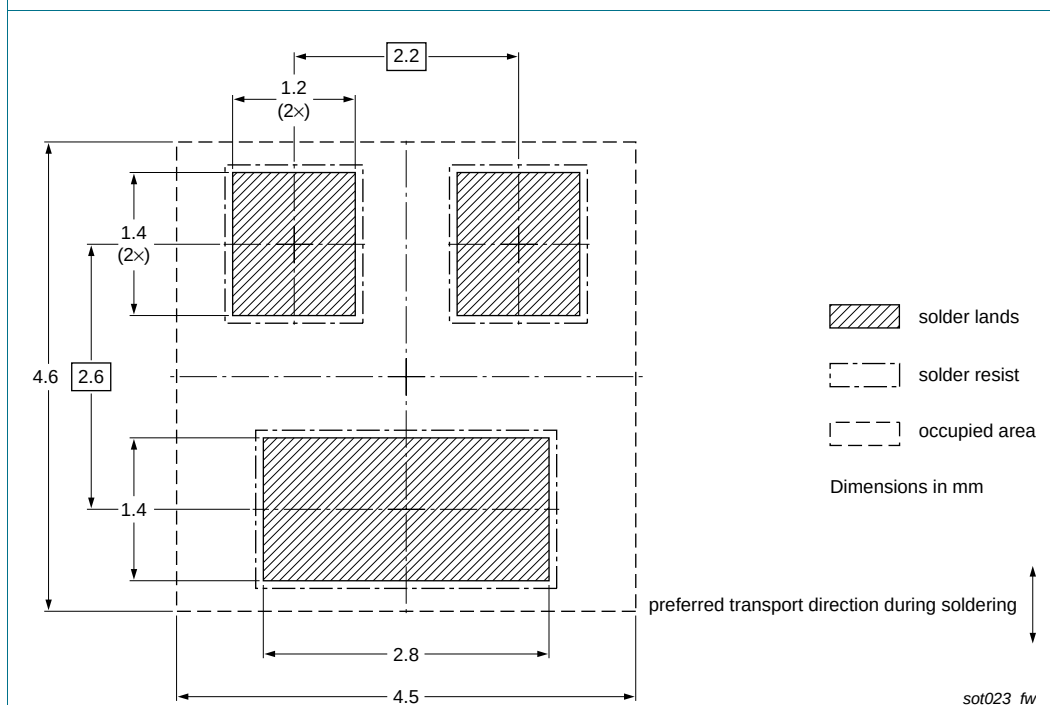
Wave soldering footprint SOT23 (TO-236AB)
